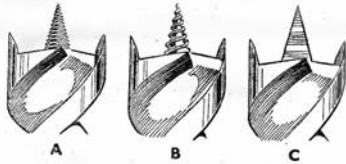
TYPES OF THREADS USED IN TWIST BITS
